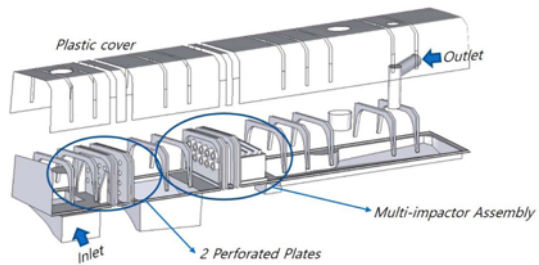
Geometry of cylinder head-integrated Oil-mist Separator
